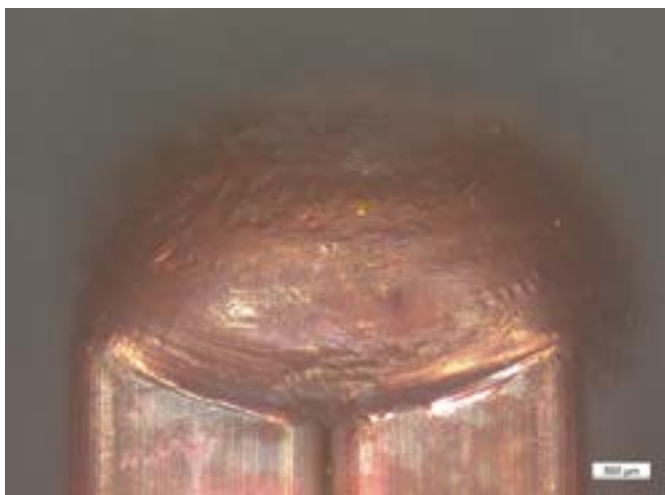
Welding of copper hairpins with a cross-section of 9.9 mm<sup>2</sup> each in approximately 250 ms. ©Laserline
